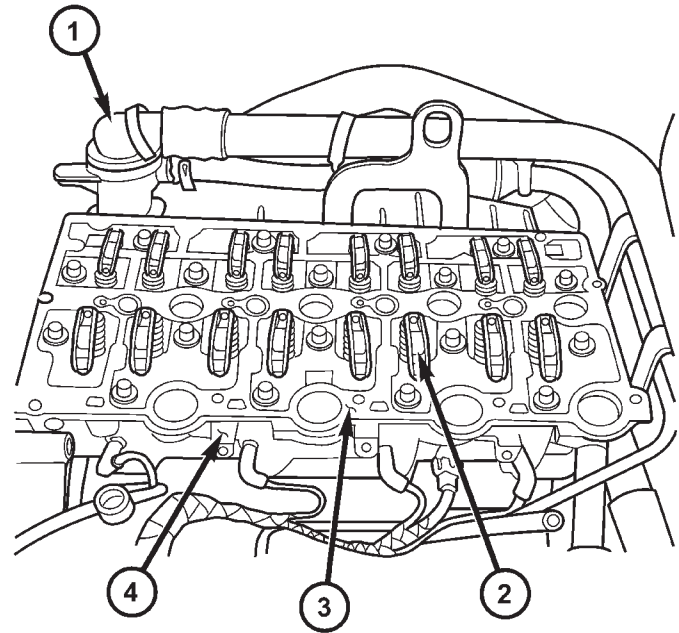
CYLINDER HEAD COVER/INTAKE MANIFOLD ASSEMBLY
